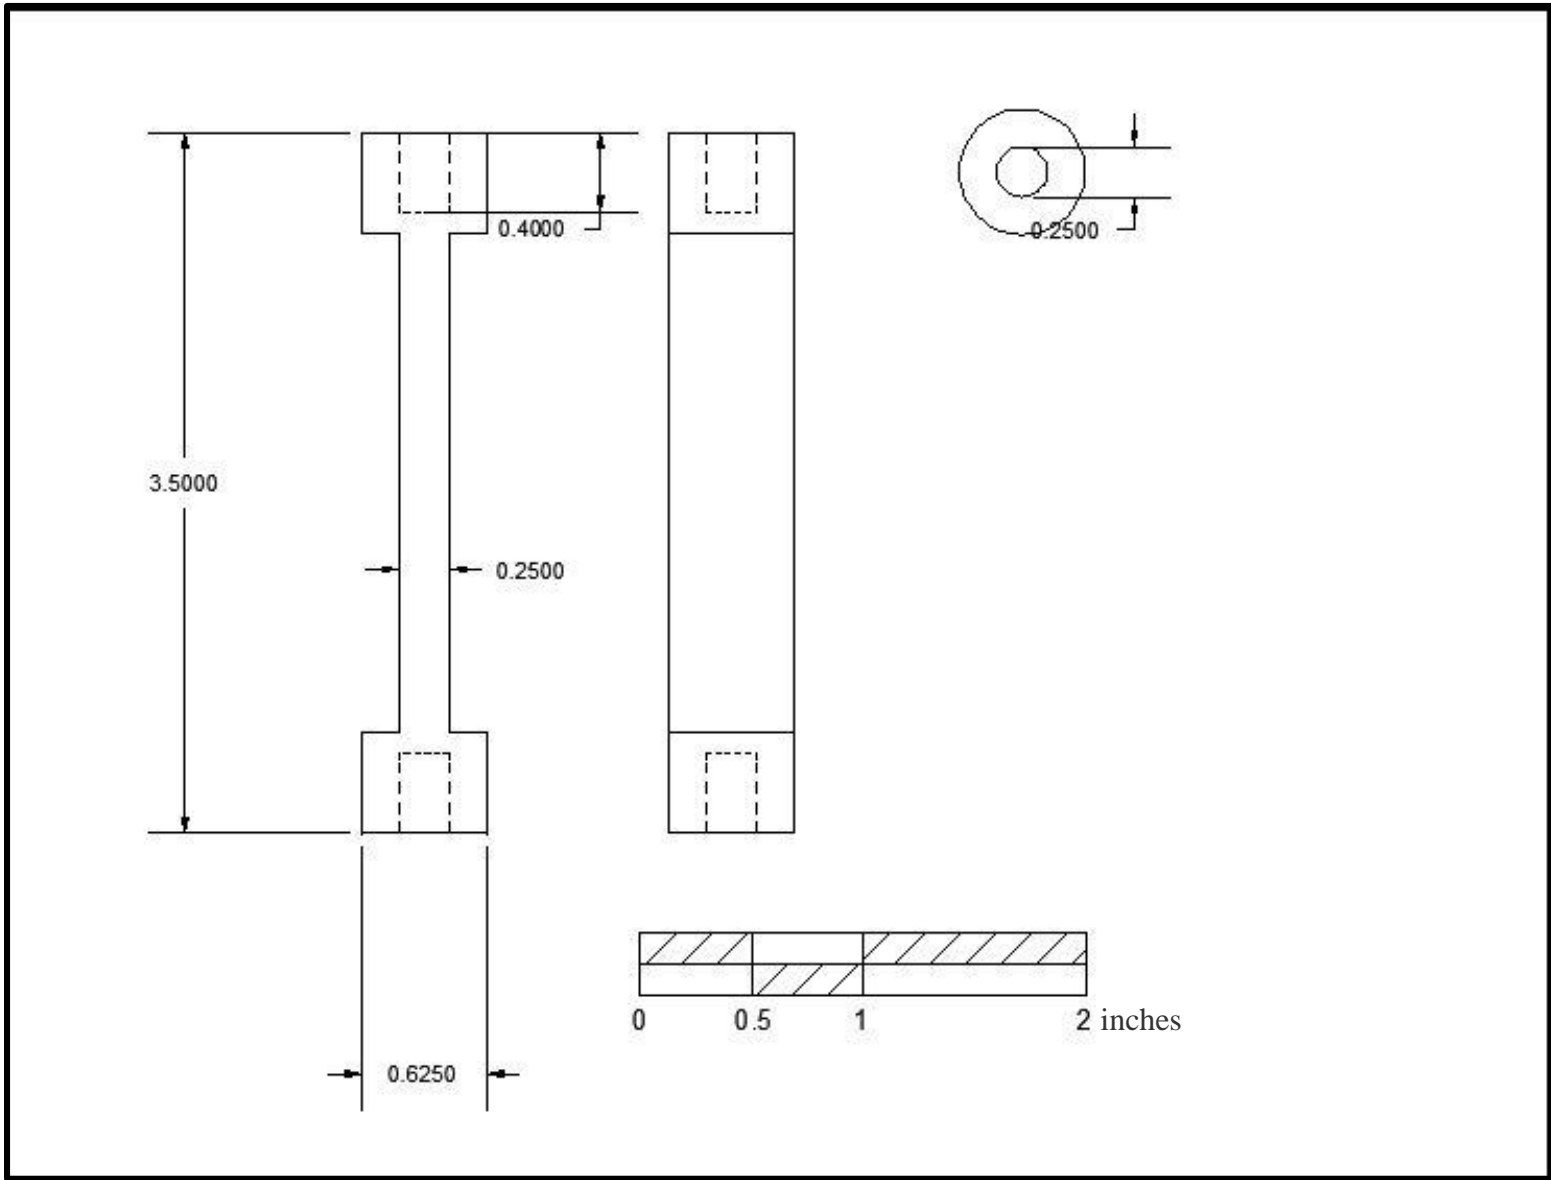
Detailed Drawings of Tension Sensing Element - Scale and Dimensions in Inches
